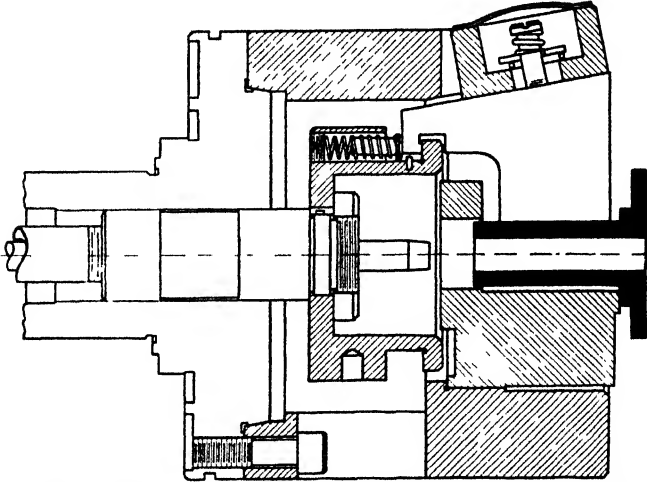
Special collet chuck which holds the work (See Fig. 77.)
